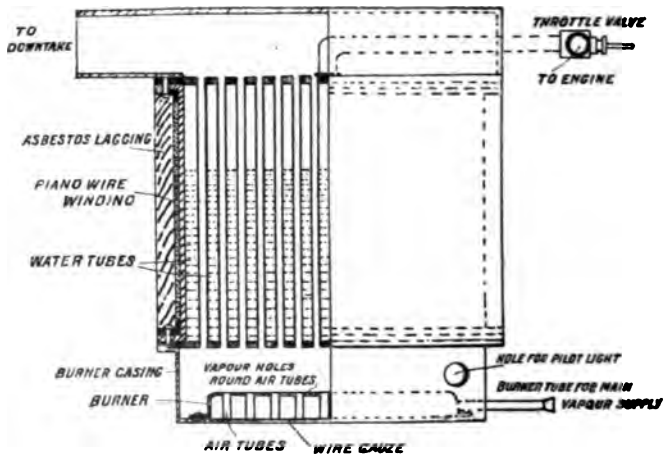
Section of a Multitubular Boiler with Main Burner in Position
